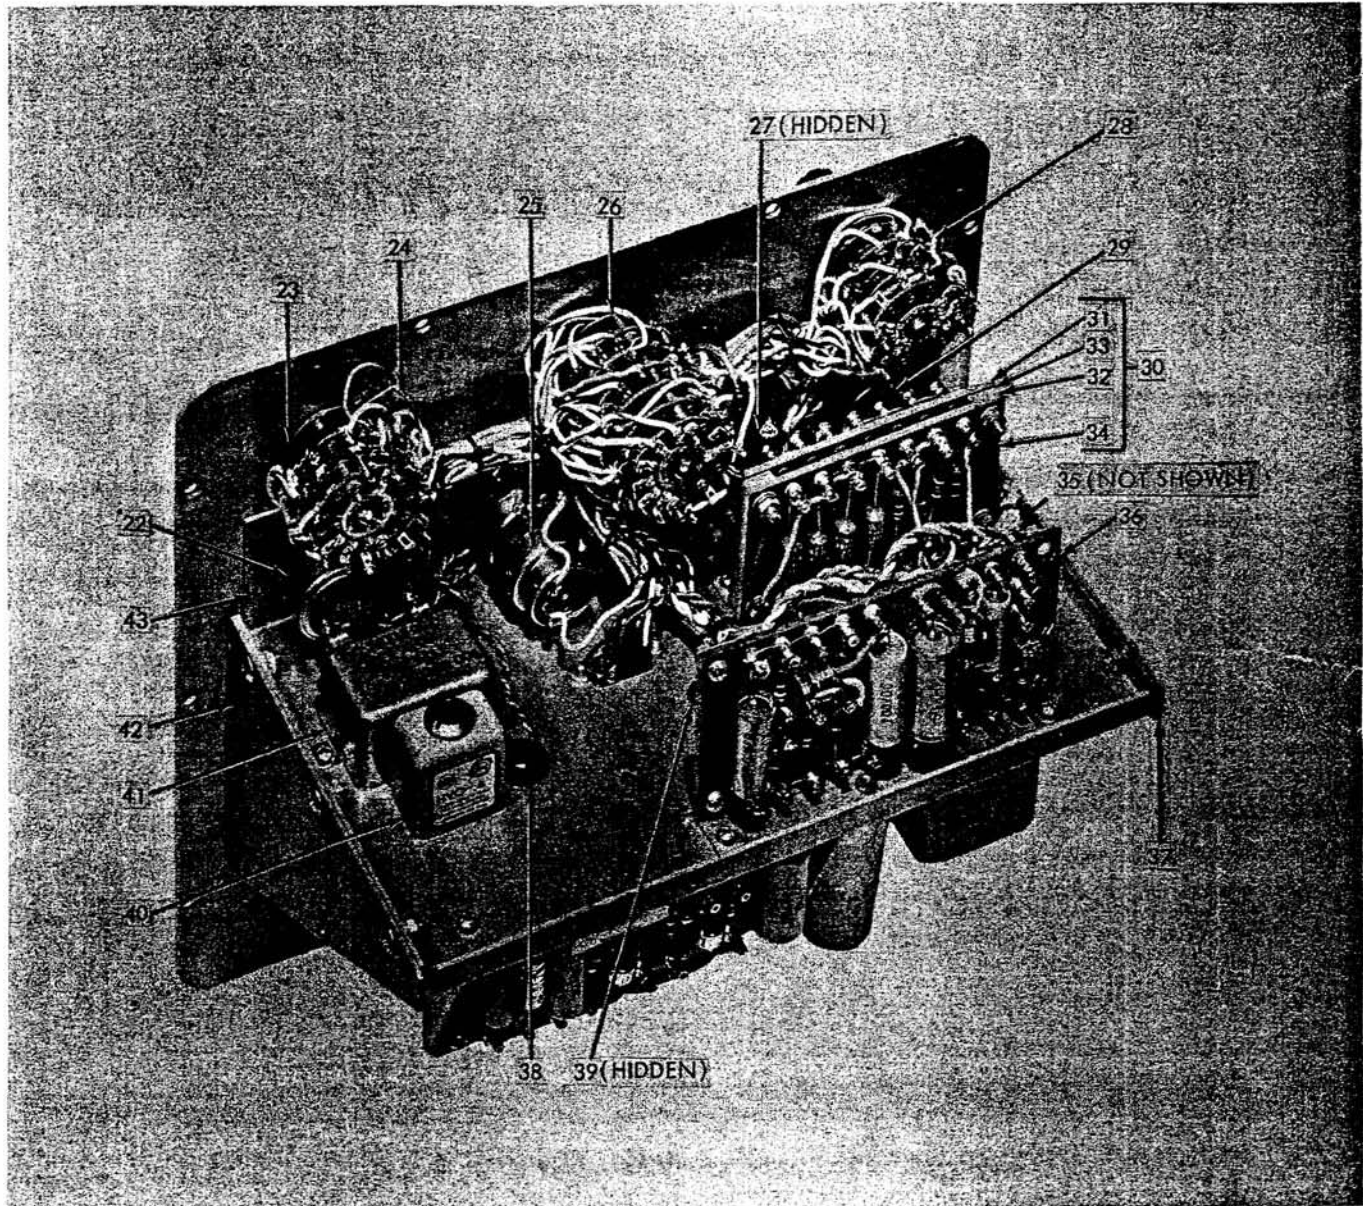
Panel and Chassis Assembly (Sheet 2 of 2)
